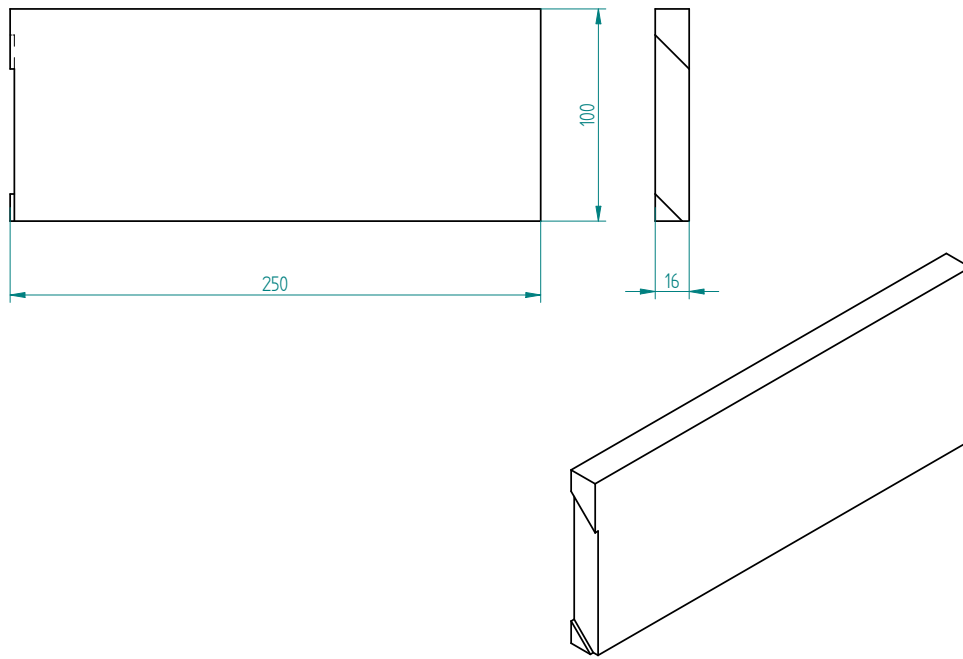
Shaped part : face-1 for perpendiculator tool
